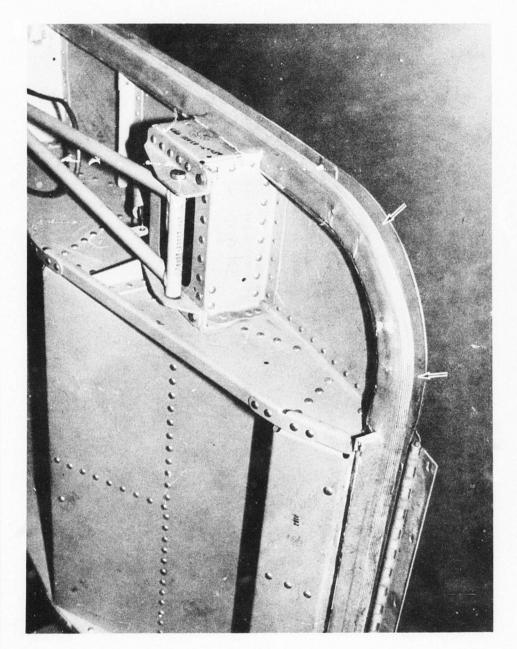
Lower Personnel Door, Redesign, Improved Seal,
